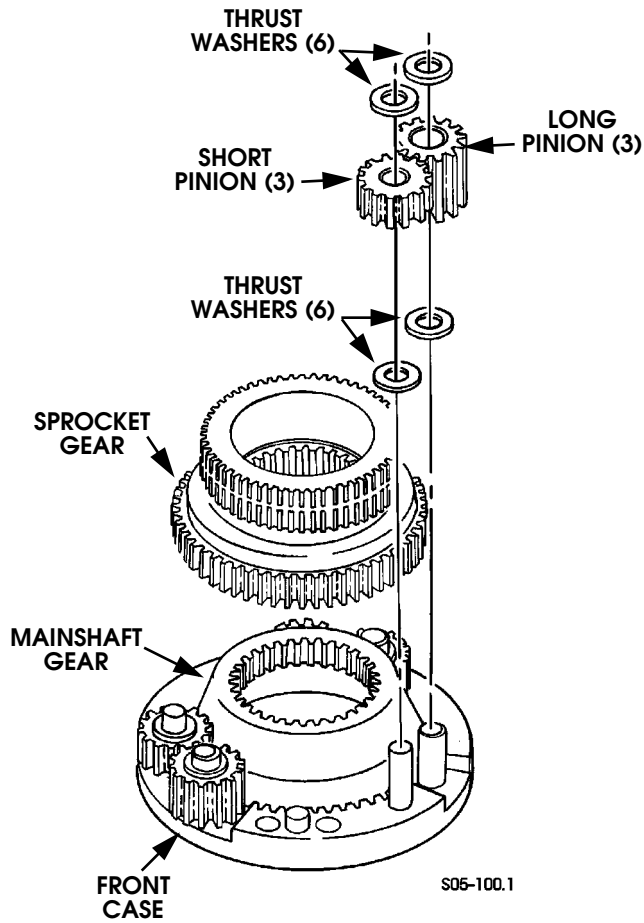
Differential Pinion and Sprocket Gear Installation
